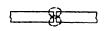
Shapes of welds. (Reproduced by permission of The
